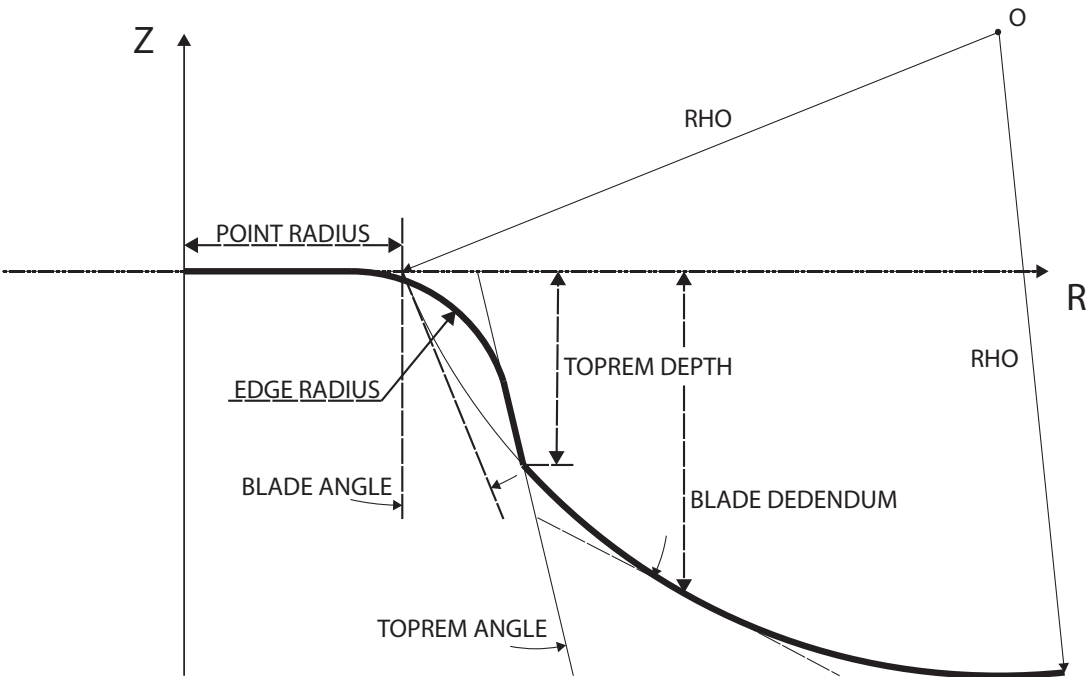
Cutter description for Curved Blade with Straight Toprem (New Cutter)
